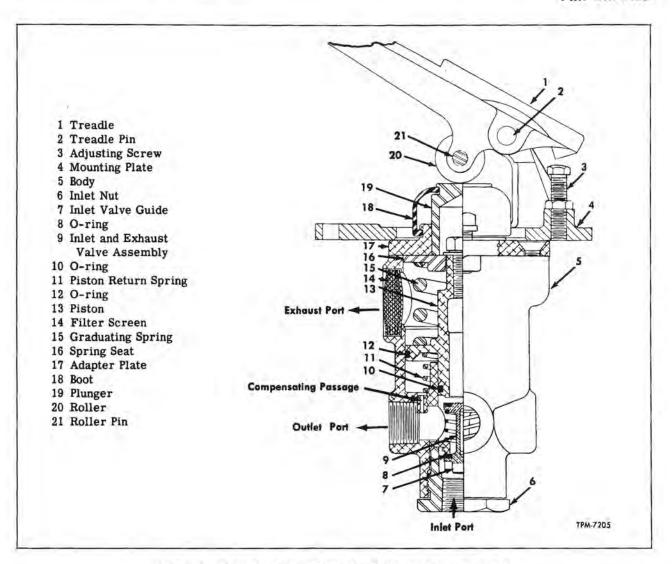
Brake Application Valve (Bendix-Westinghouse-Type E-1)
